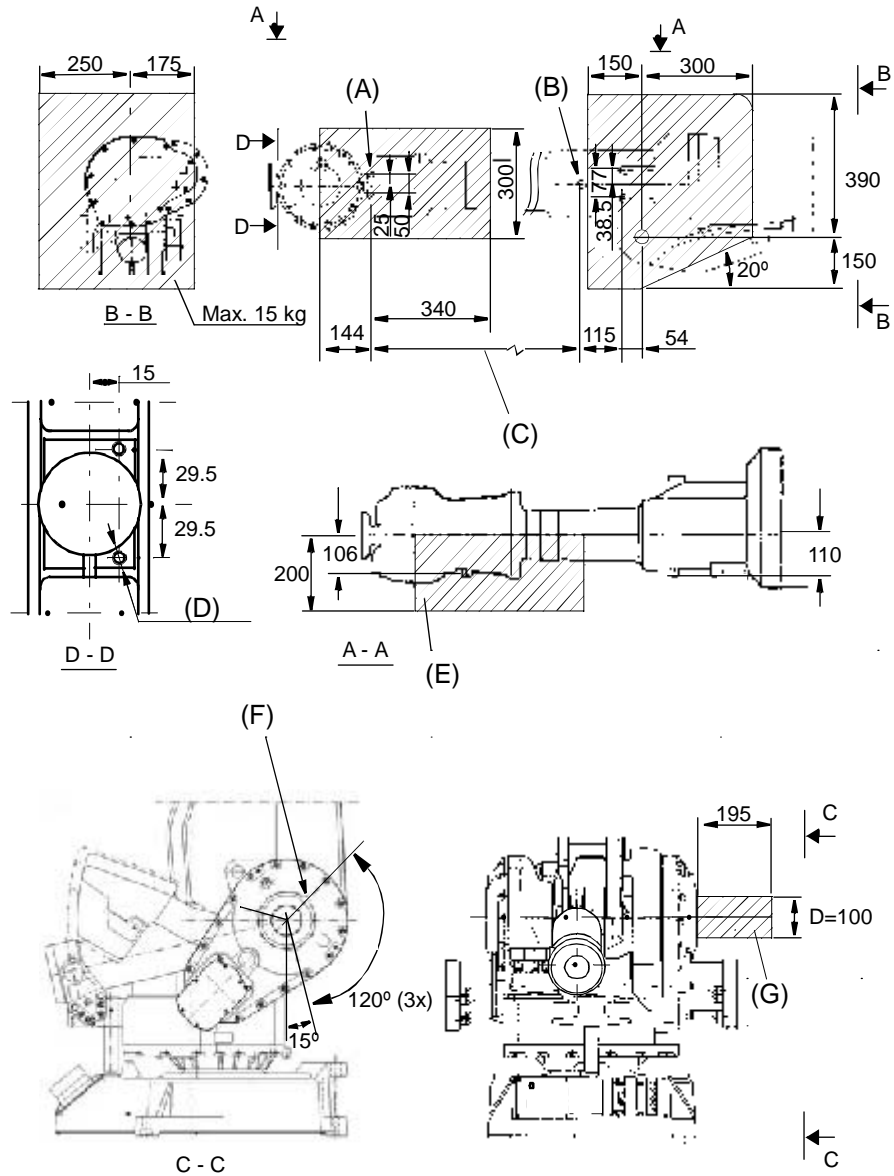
The shaded area indicates the permitted positions (center of gravity) for any extra equipment mounted in the holes (dimensions in mm).
